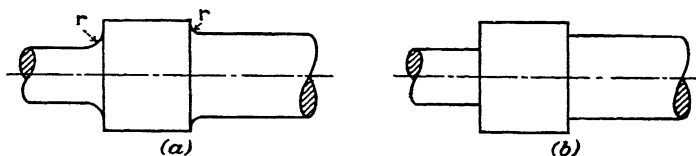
Fillets are better from a machining standpoint on lathe work than square corners.
